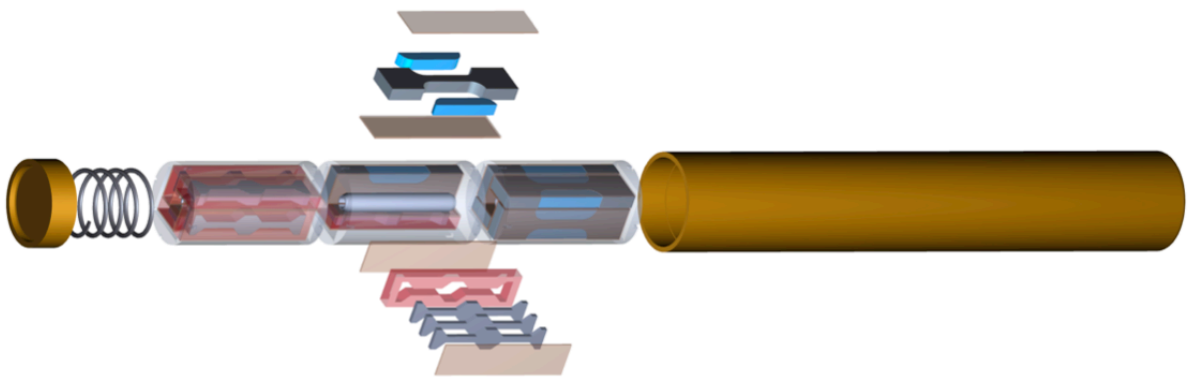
Finalized HFIR rabbit design for irradiation of welded and non-welded tensile specimens.
